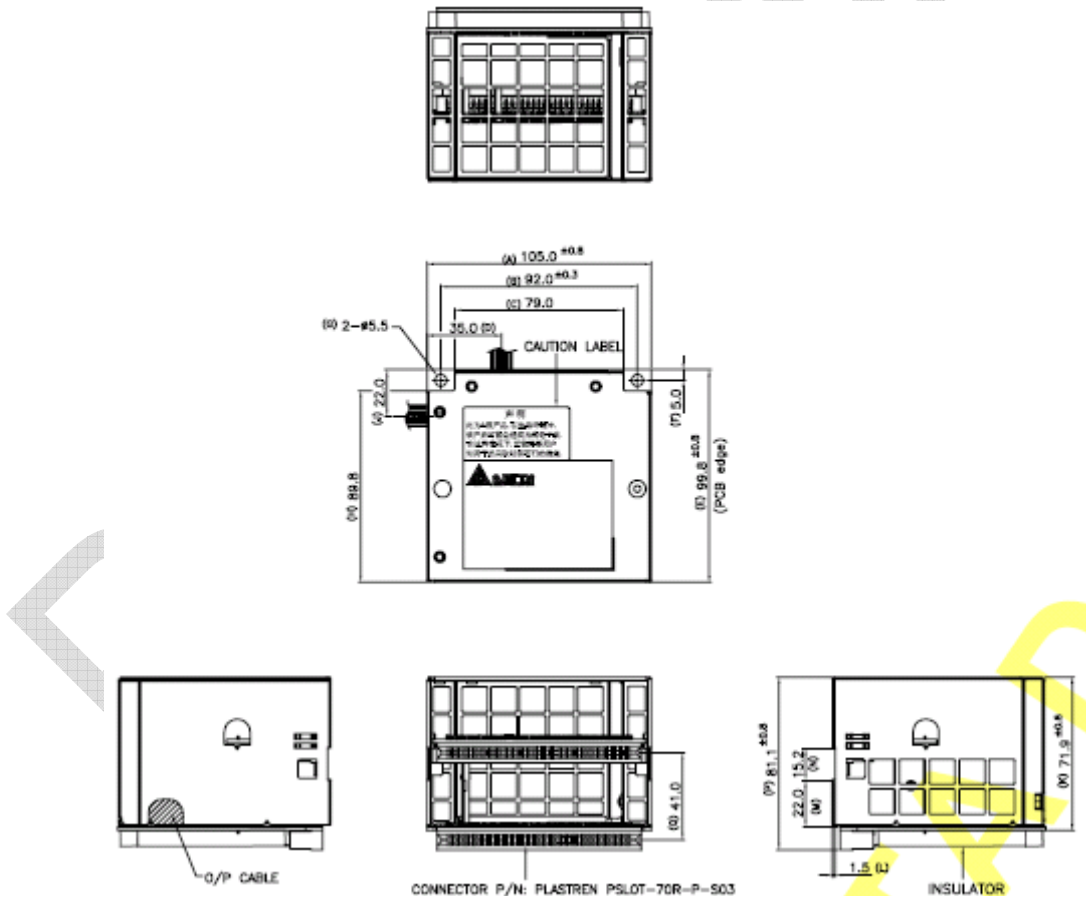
Mechanical Drawing of Intel® Server Chassis SR2500 Power Distribution Module
